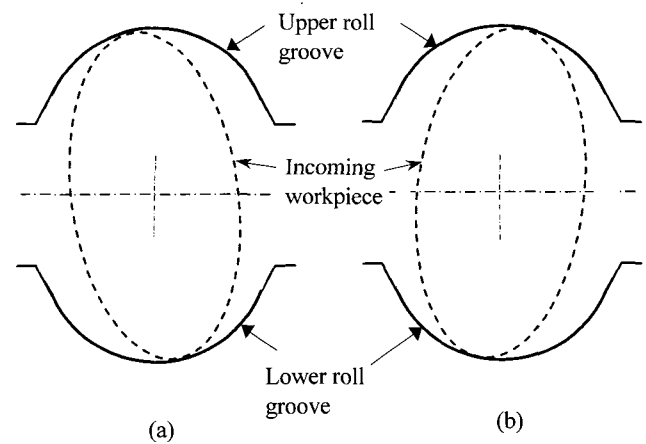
Incoming workpiece and roll groove in oval-round rolling pass at the very biting position. (front view) (a) Incoming oval shape workpiece is slightly twisted left wise and (b) Incoming oval shape workpiece is slightly twisted right wise
